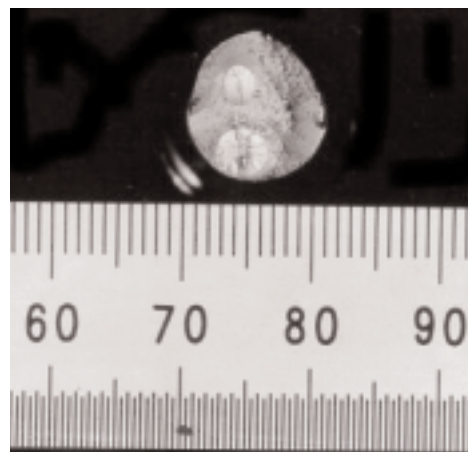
“Fish-eyes” on an all-weld-metal tensile specimen fracture surface.
